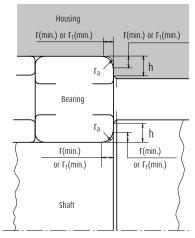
Chamfer Dimensions, Fillet Radius of Shaft and Housing, and Shoulder Height
